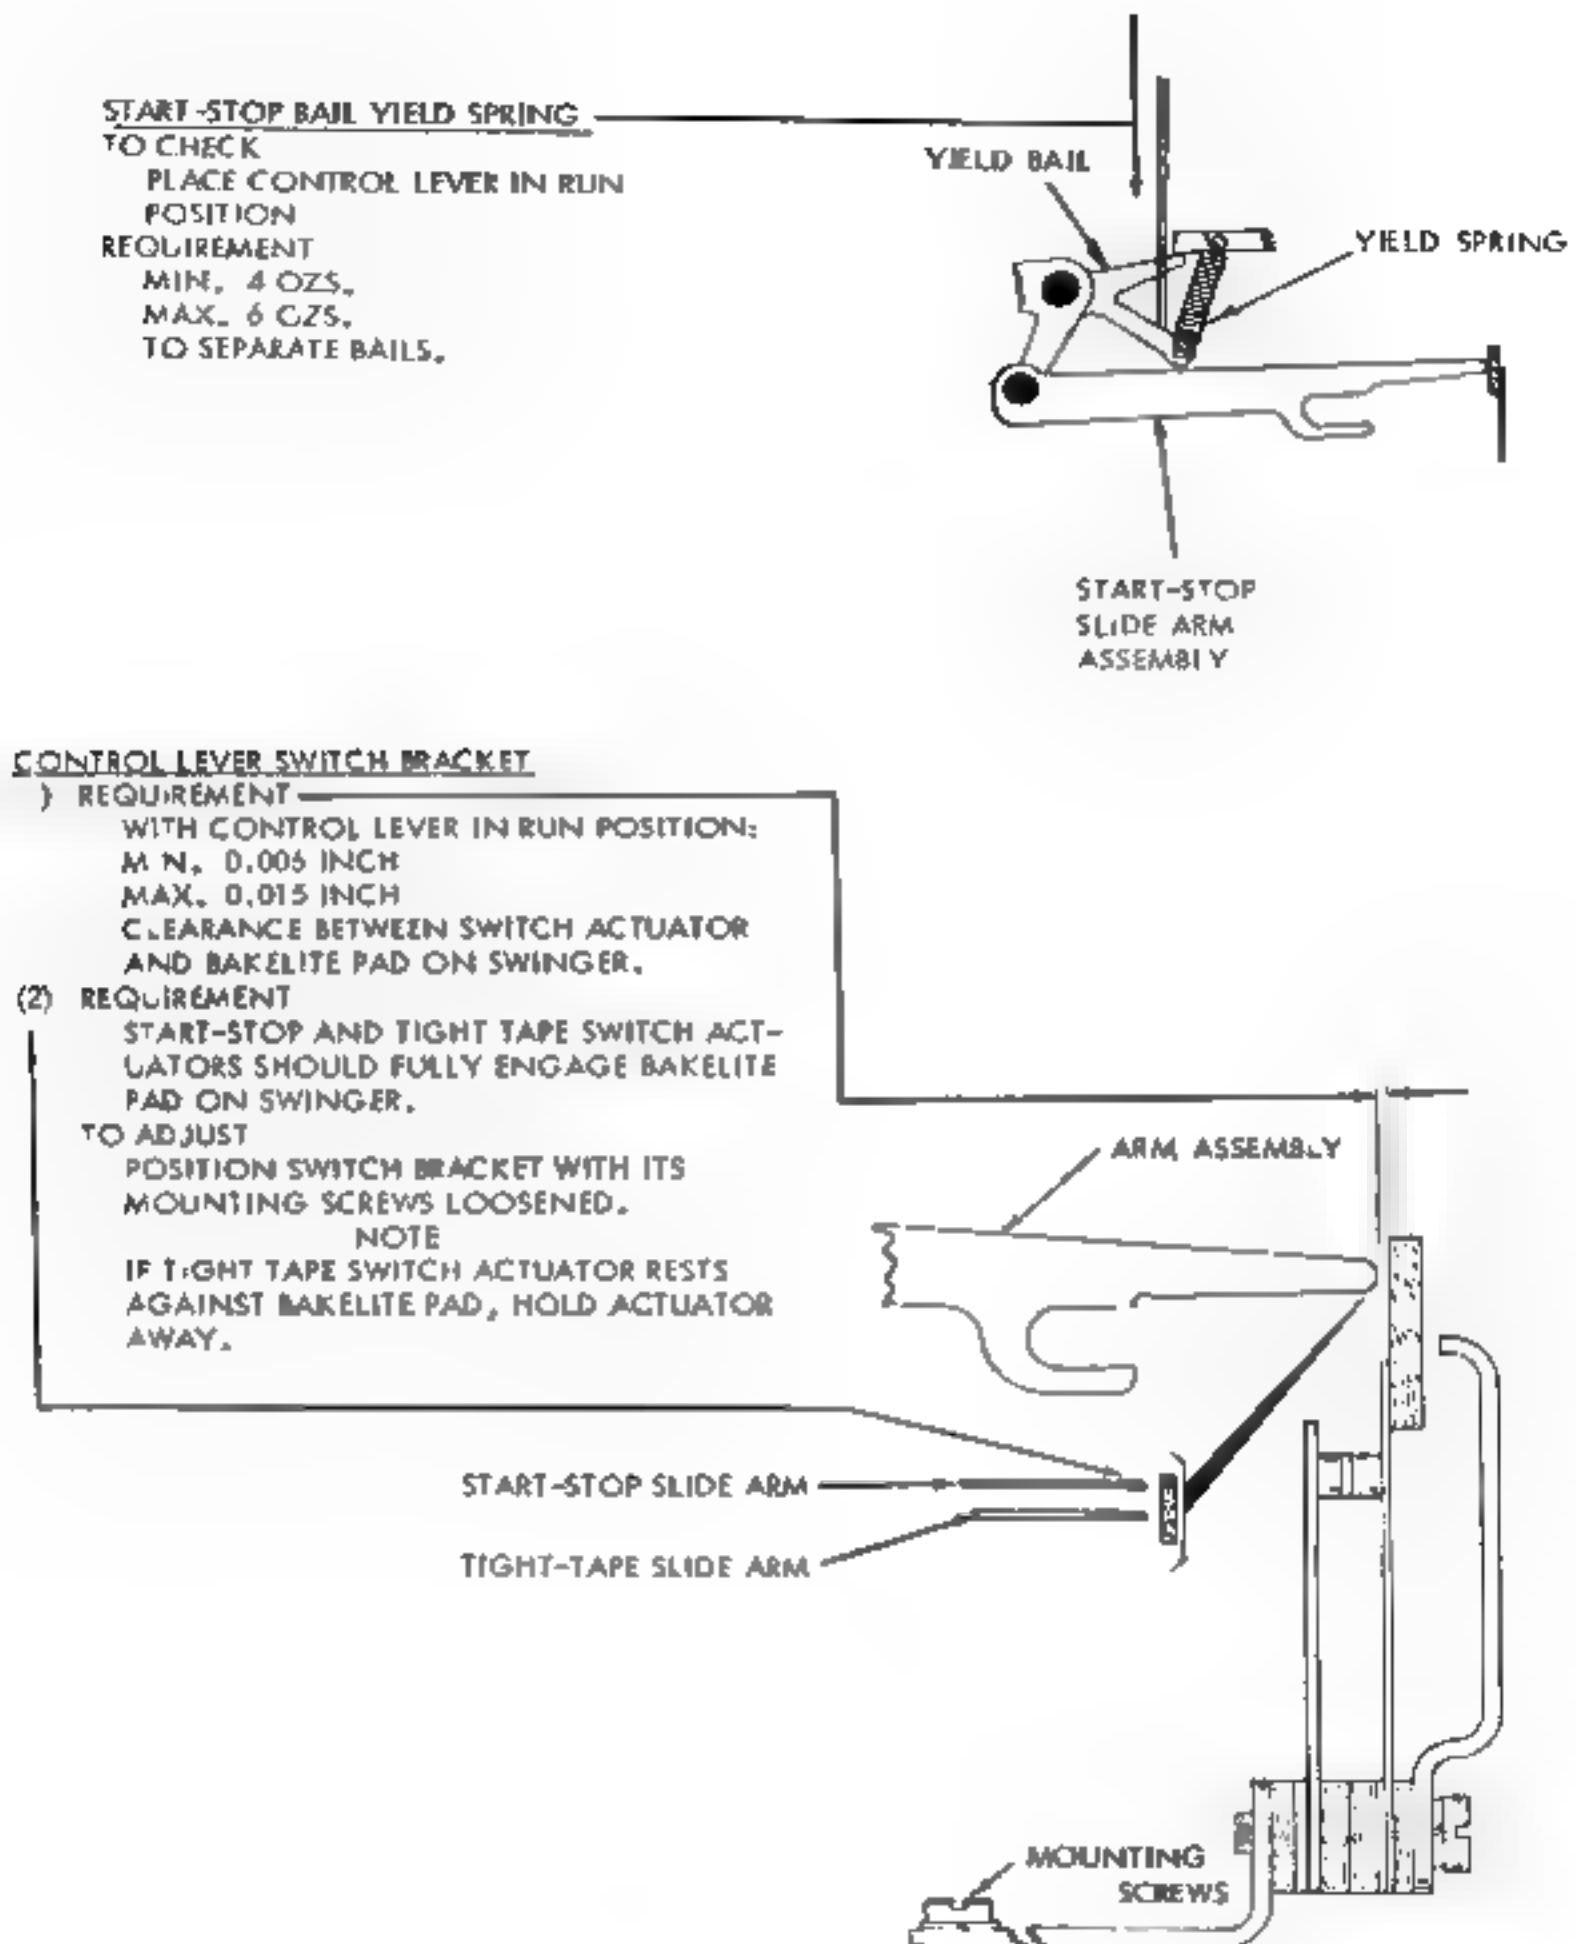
22. START-STOP SWITCH ASSEMBLY
